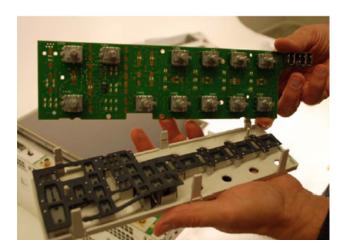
Remove the front panel keyboard from the plastic keyboard cover
